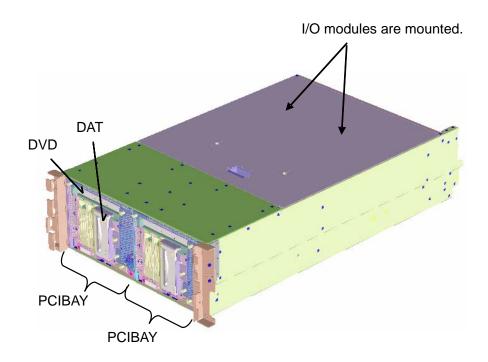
I/O Enclosure (A View without the Filter Cover)
